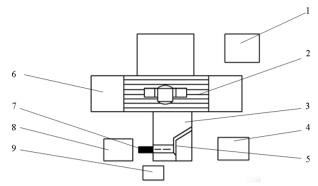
Linear setting FMM for machining the body of the class [2]
